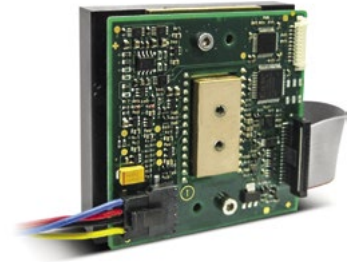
The sub heat sink has been attached to the bottom of the detector and is ready to interface to a larger heat sink(i). The detector itself is hidden in this picture. Its pins have been plugged into a socket without mechanical stress. A custom optics has been applied to the top side of the detector by using screws and an additional submount. Care has been taken to make a stress release and not to bend the detector.
